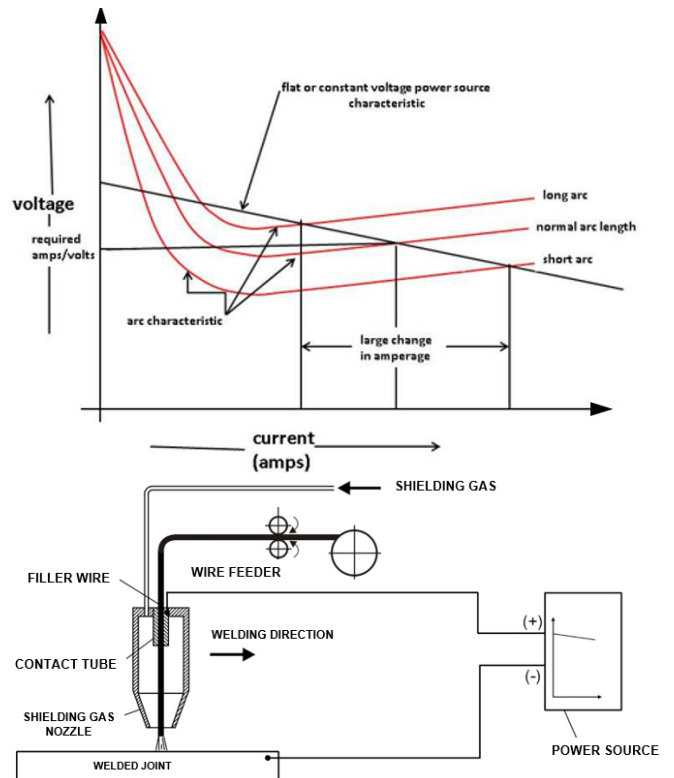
The GMA welding Volt-Ampere relationship for a constant voltage inverter digital power source and the scheme of GMA welding installation [1-16]
